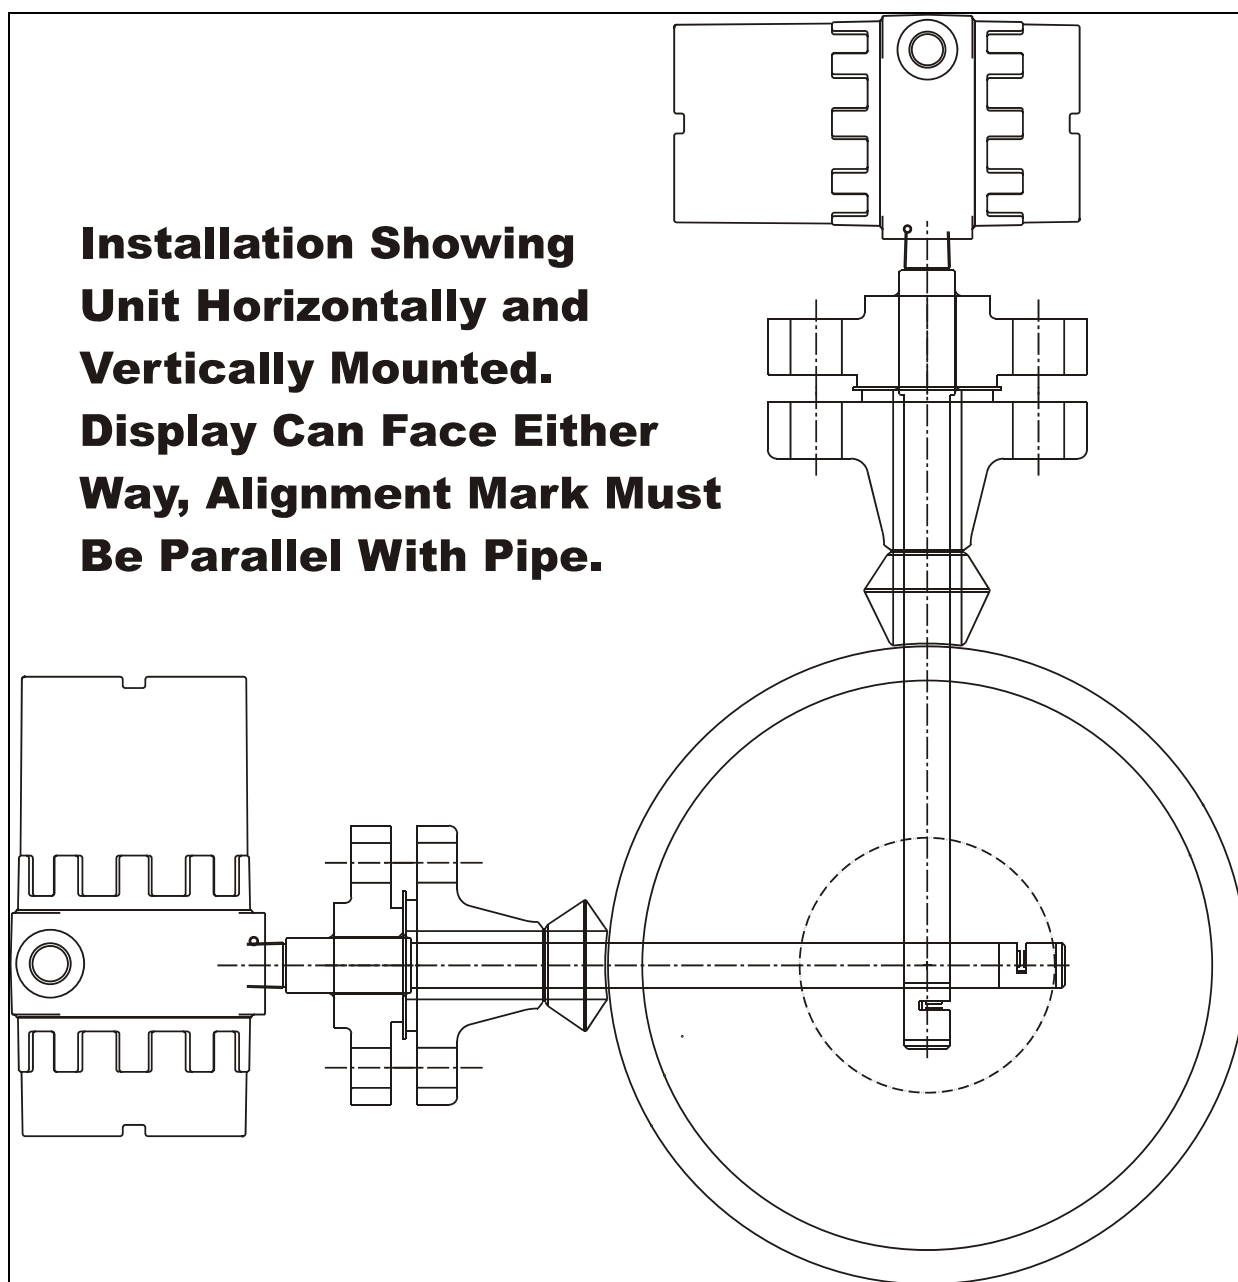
Installation Showing Flanged Unit Mounted in Different Orientations
